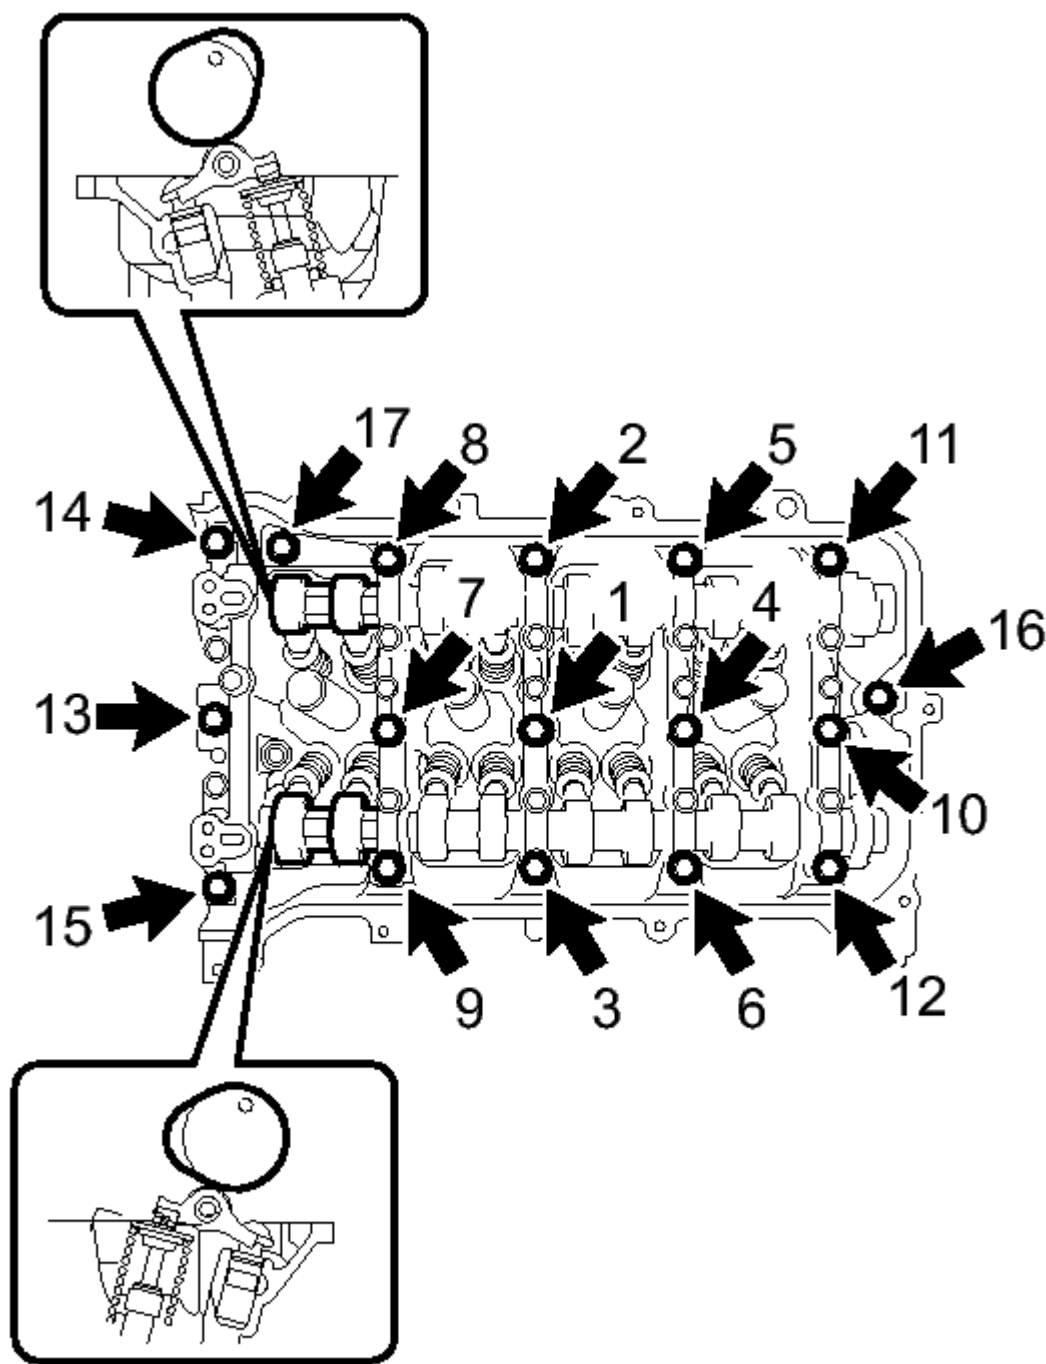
Identifying Setting Camshafts & Camshaft Housing Bolts With Tightening Sequence
